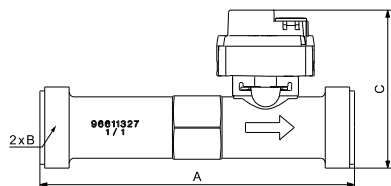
Dimensions, VFS, 5-100 l/min, without adapter
